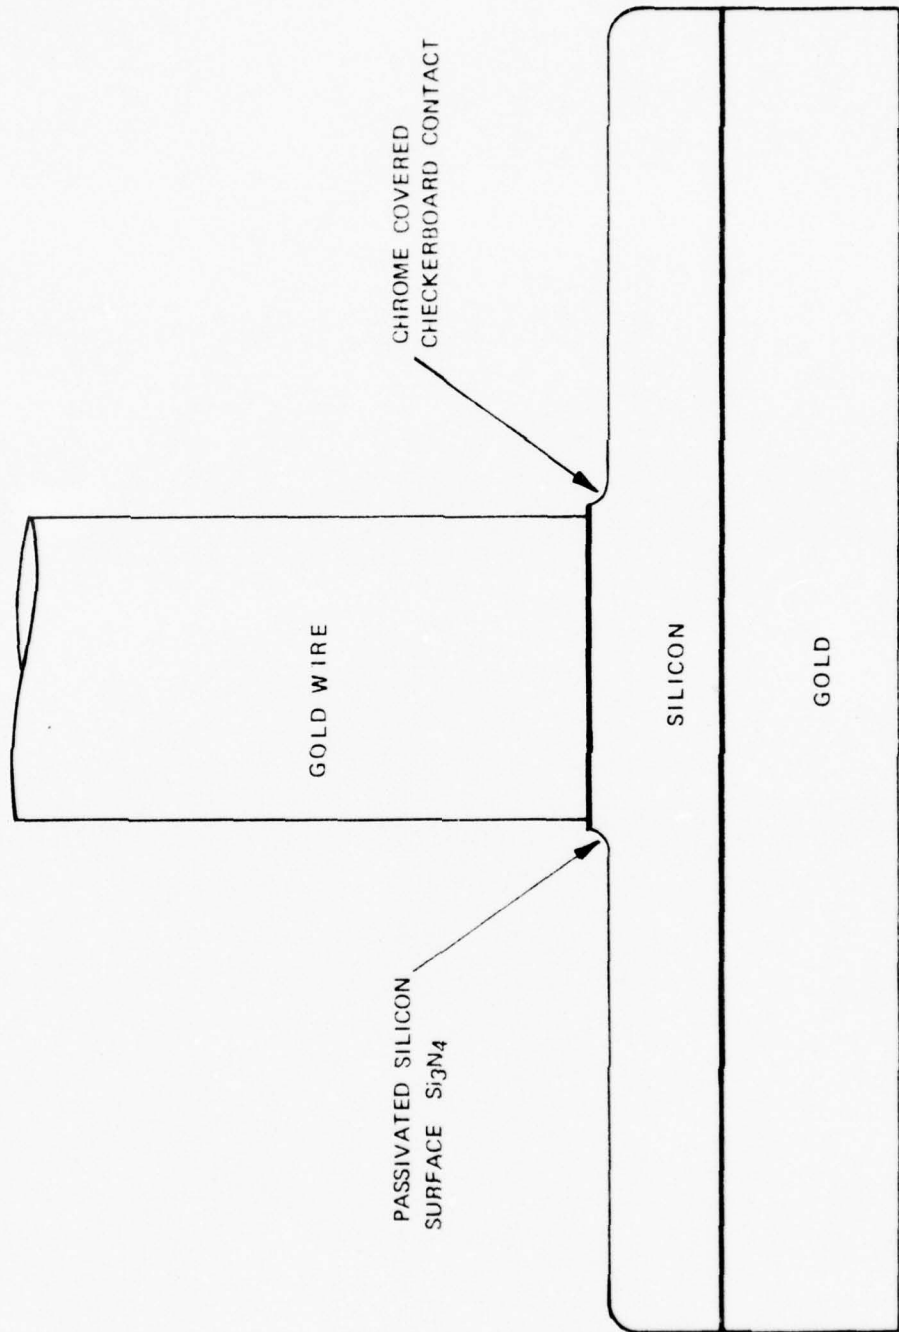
COMPLETED CHIP READY FOR IRIS MOUNTING
